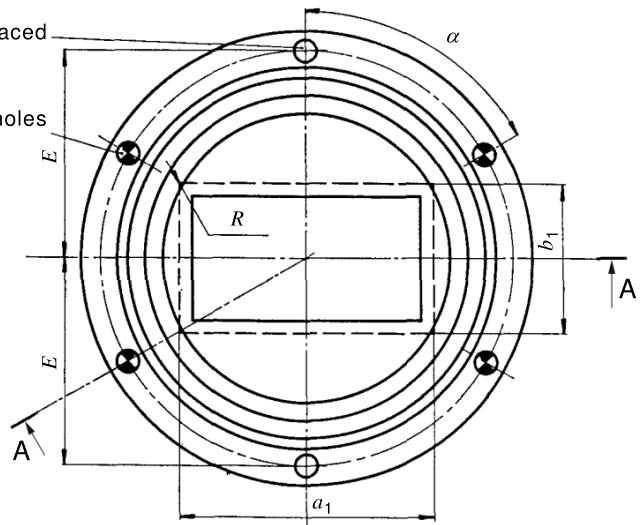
Flange type A: 60154 IEC-AR 32 gasket
